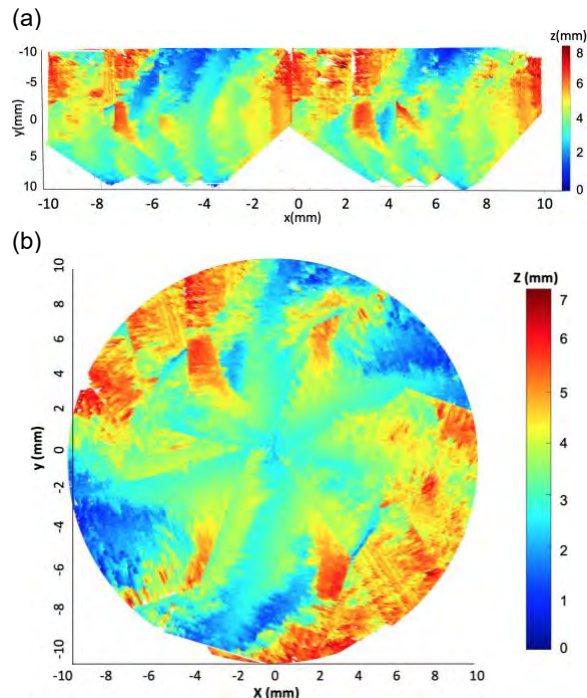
stitched panorama surface for tool body (a) and tool bit (b)
